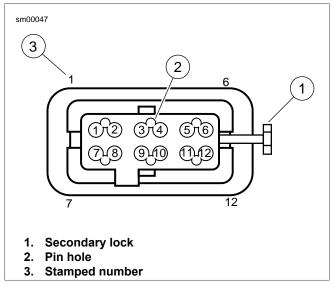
Delphi Micro-64 Sealed Connector: Housing
